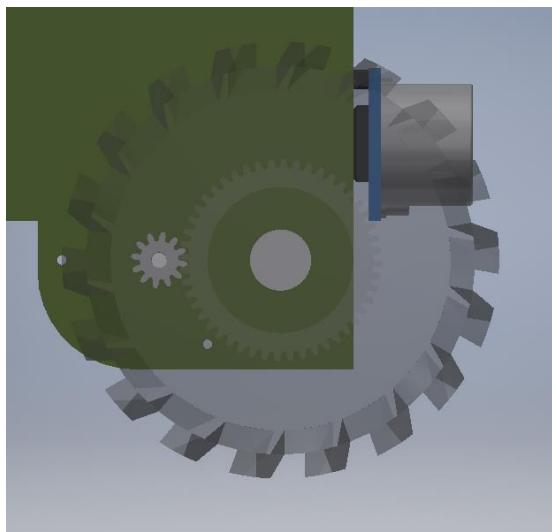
The drivetrain for the front right wheel is show inside of the wheel
